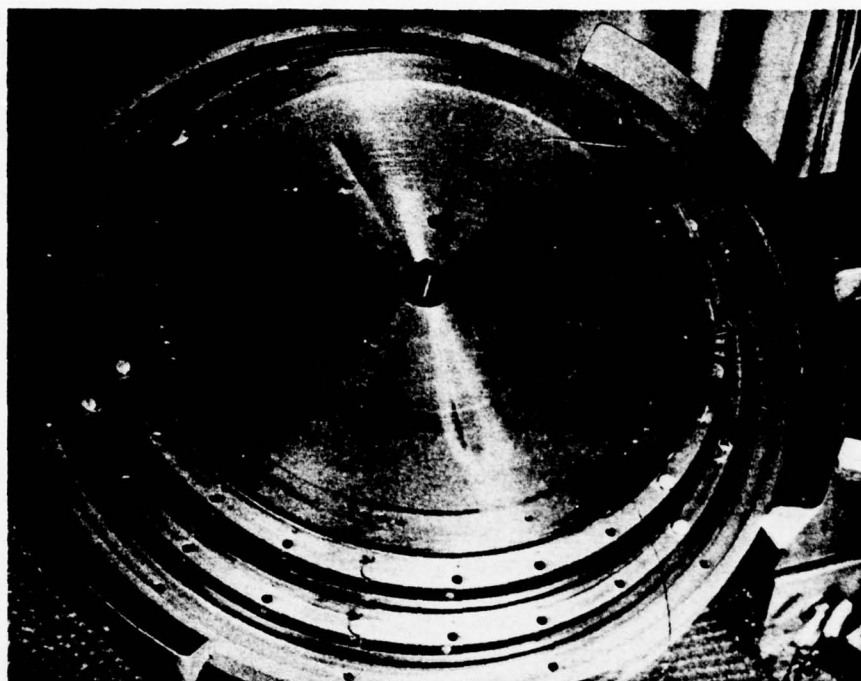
View of Partial Assembly; Baseplate; Cover of 3rd Magnetic Shield; Support Ring of Lower Outer Oven; Cover of 2nd Magnetic Shield; Support Ring of Lower Inner Oven (top)
